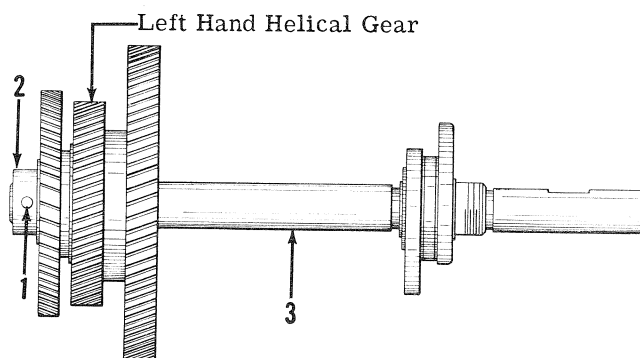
SHAFT ASSEMBLY - VERTICAL CAM
